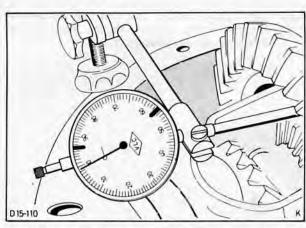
Place dial indicator plunger on inner crown wheel boss
